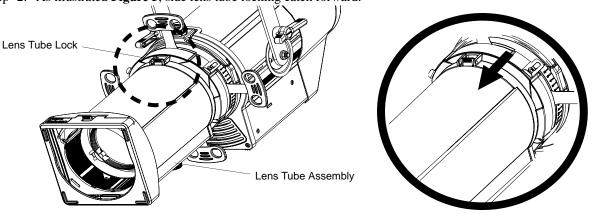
Lens Tube Assembly Removal - Lens Locking Catch
